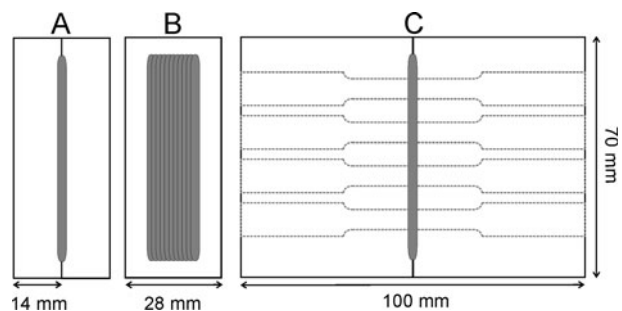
Schematic representation of butt welding and laser-remelting treatments.
